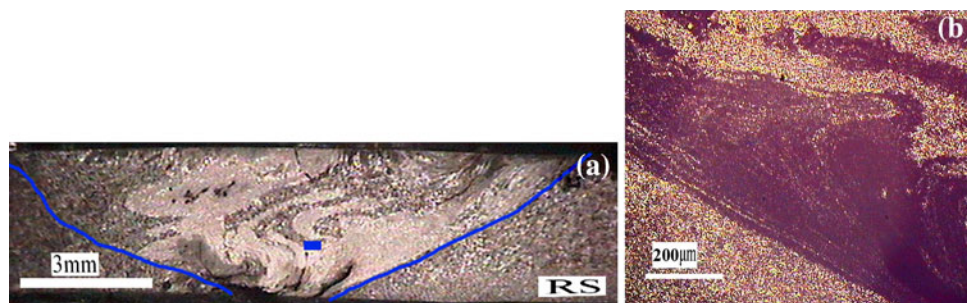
(a) Macroscopic view of the joint cross section, the joint formed by two pieces; a pin made of tungsten carbide and the shoulder of HSS; (b) Material flow in the marked area
